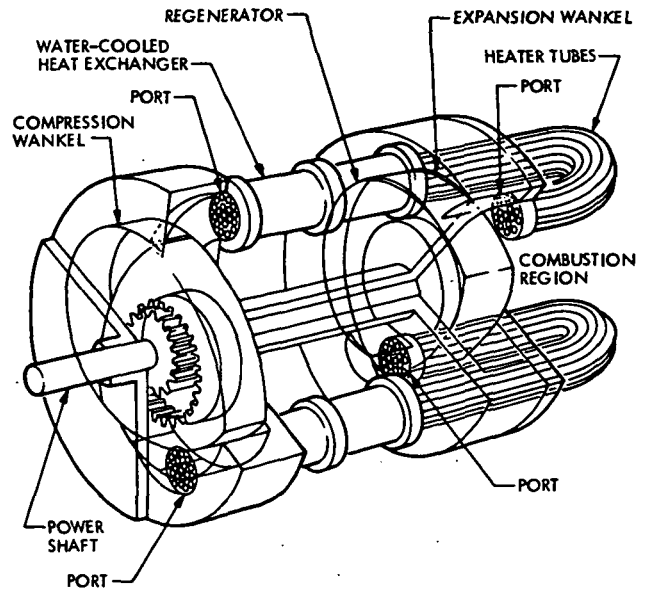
Rotary expander Stirling engine (Ref. 6-14)
